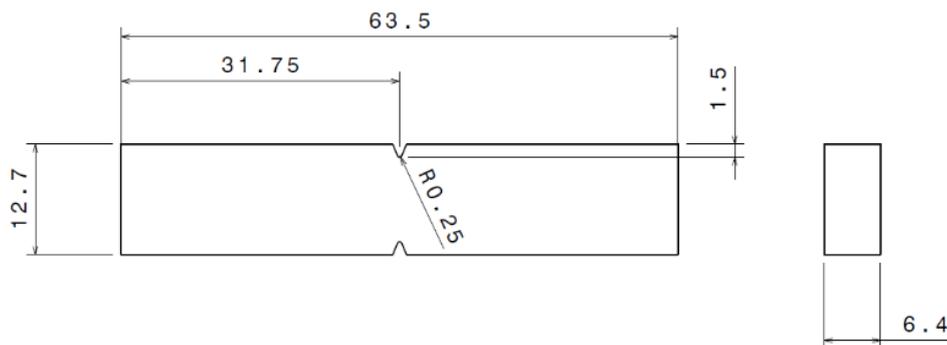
Dimensions of the pendulum impact resistance test specimen (in millimetres).
